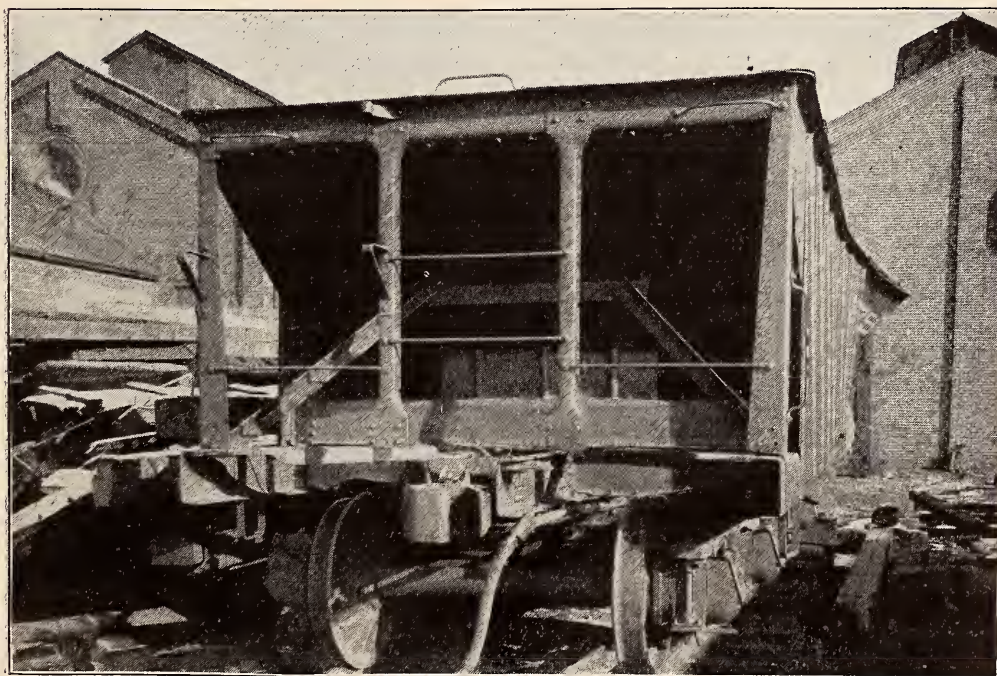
FRICITION DRAFT GEAR IN A COLLISION.
